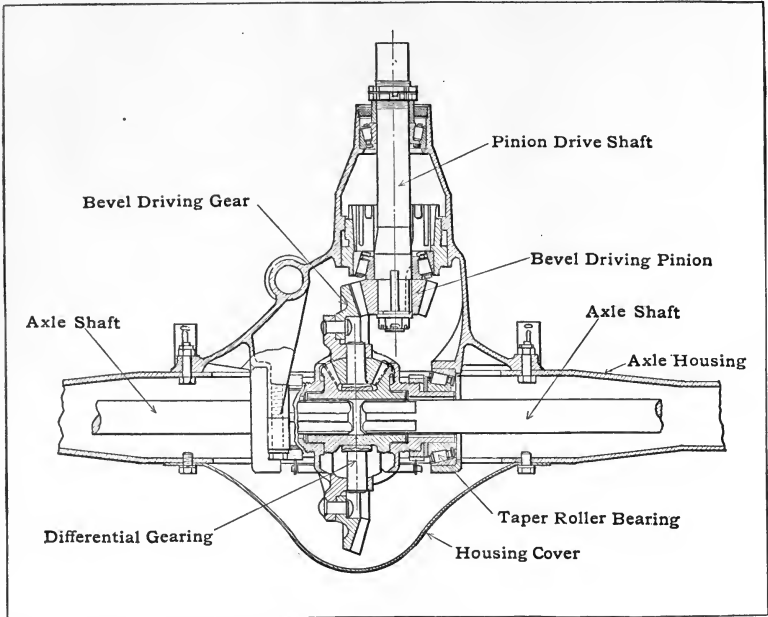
Bevel-Gear Drive Assembly Mounted on Timken Tapered Roller Bearings.
